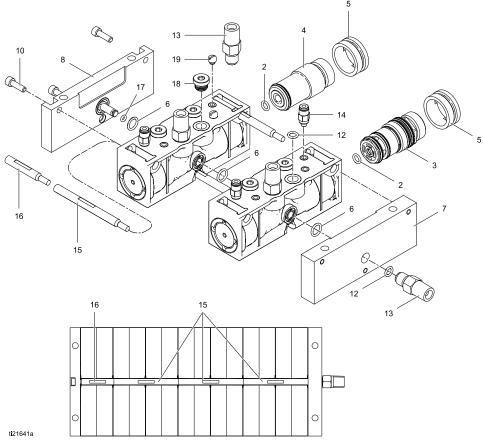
Install an Expansion Kit (Low Pressure Valve Manifold Shown)
